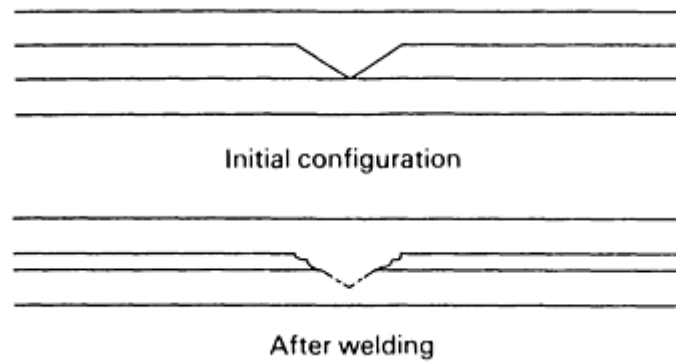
TYPICAL CONFIGURATION FOR SOLID-PROJECTION WELDING
